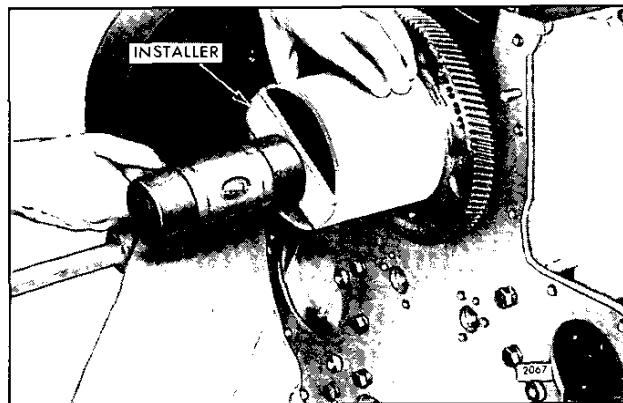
Installing Crankshaft Timing Gear Using Installer J 7557
